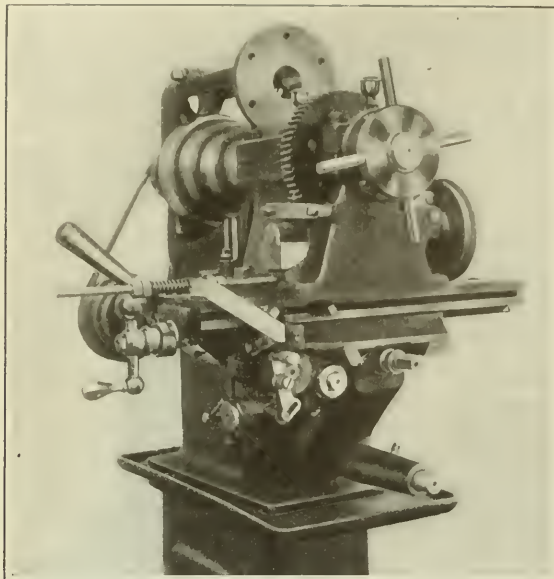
American Ammunition Co.'s Thread Miller for Internal and External Threads
